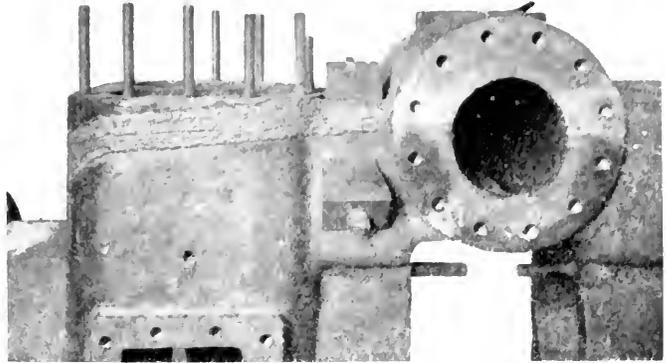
Finished Welding Repair of the Casting Shown in Fig. 13
